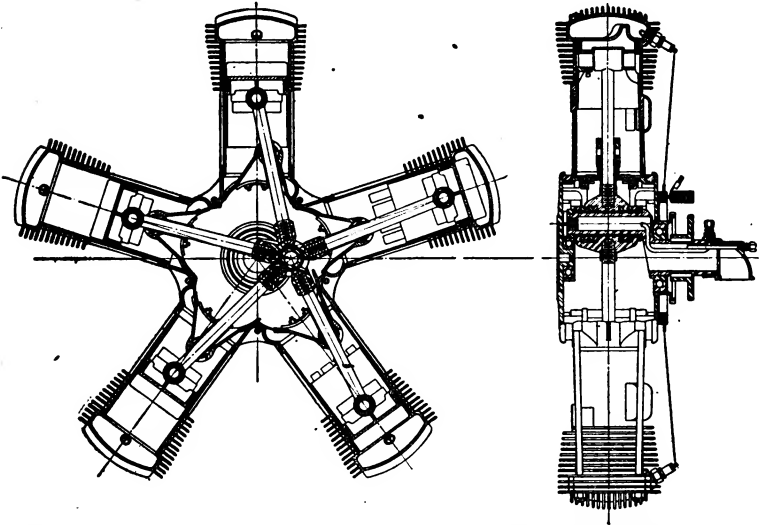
Drawings Showing General Construction of Frederickson Five-Cylinder Motor
